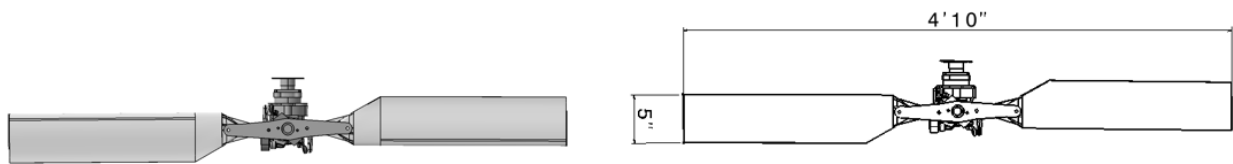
Part 27 Rotorcraft tail rotor CAD model overall dimensions.
